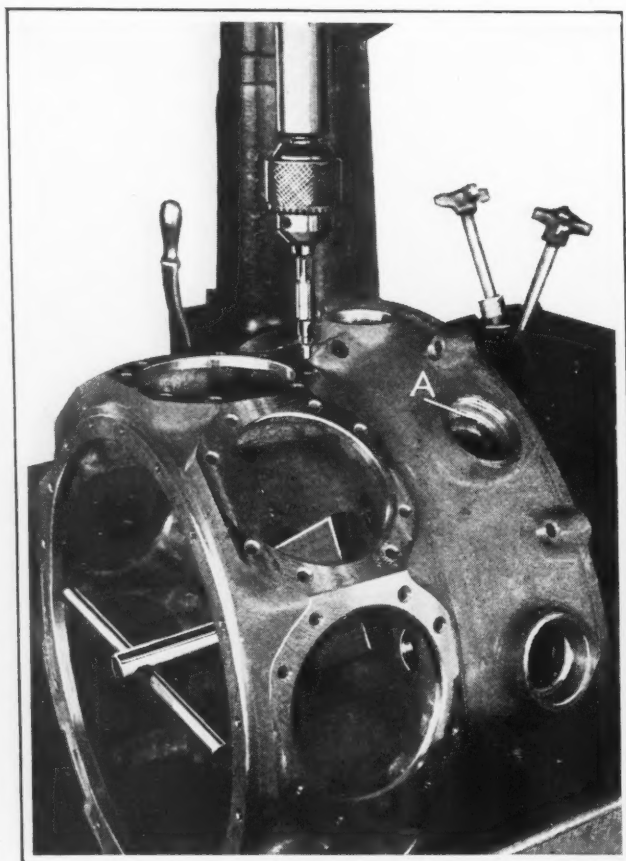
Indexing Drill Jig for Main Crankcase Section
